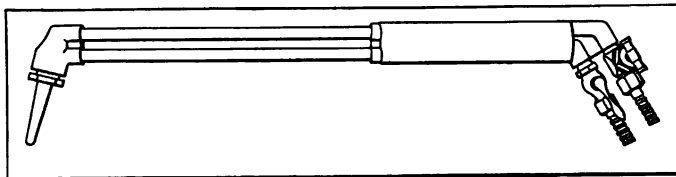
Oxy-acetylene Torch for Medium and Heavy Welding
